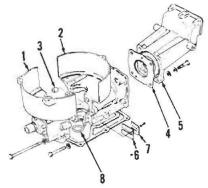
Exploded view of crankcase and cylinder assembly.
